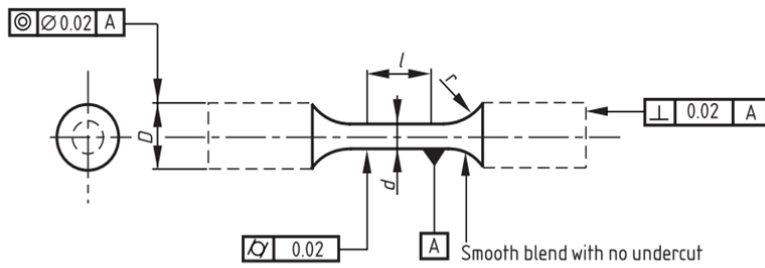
Geometry for the cylindrical fatigue specimen, dimensions in millimetres [39]
